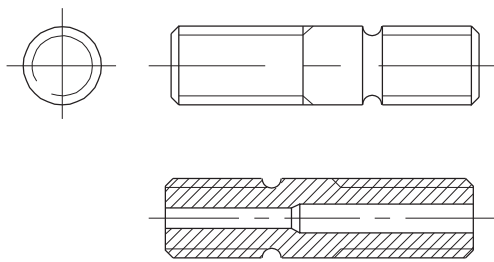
& 9 shows the conventional method of sectioning of external thread and internal thread.
